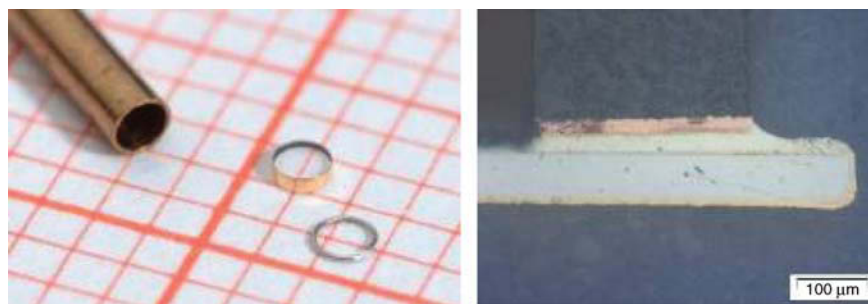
Joining components: bushing, sapphire optics, solder preform (left) Cross-section of a soldering joint (right).
